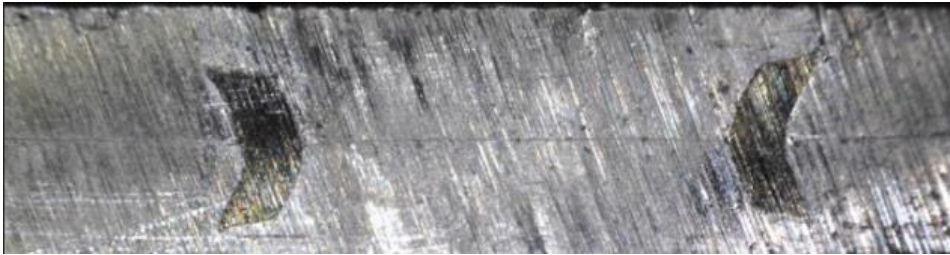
Experimental cross-section of DSSPR in 1.5 mm thick aluminum sheets.
